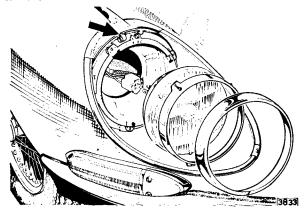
Headlamp sealed beam unit removal. The arrow indicates one of the spring clips retaining the rim,
